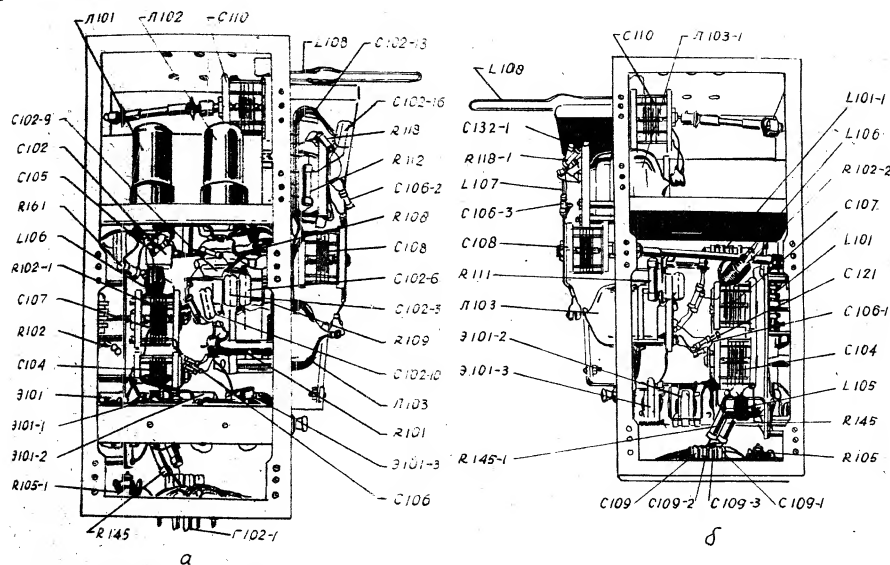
Block of the first four stages (a- right hand side view; b - left hand side view)
